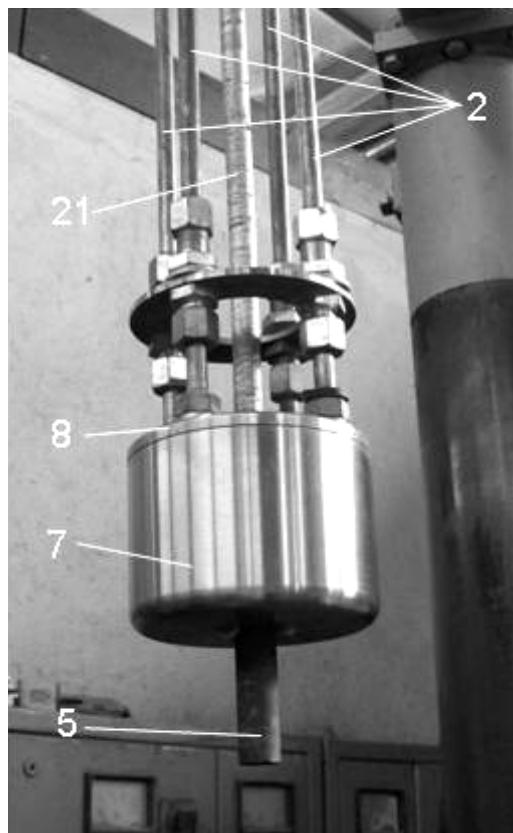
Working head of mould without graphite-fireclay cup and heat insulating wadding: 2-supply pipes; 5-graphite casting die; 7-cup with body; 8-cover; 21-cast aluminium wire.
